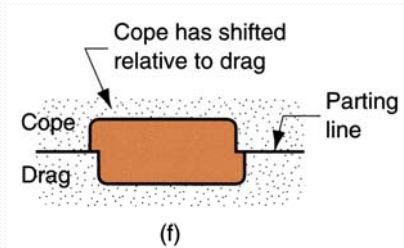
Common defects in sand castings: (f) mold shift
